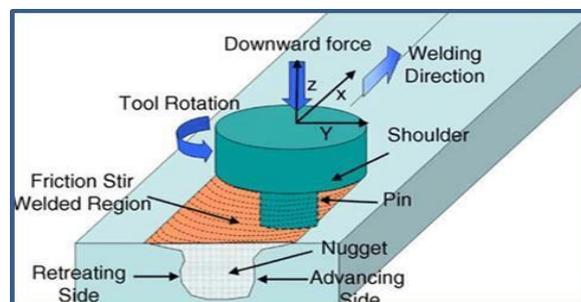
Schematic diagram of friction stir welding [1]
